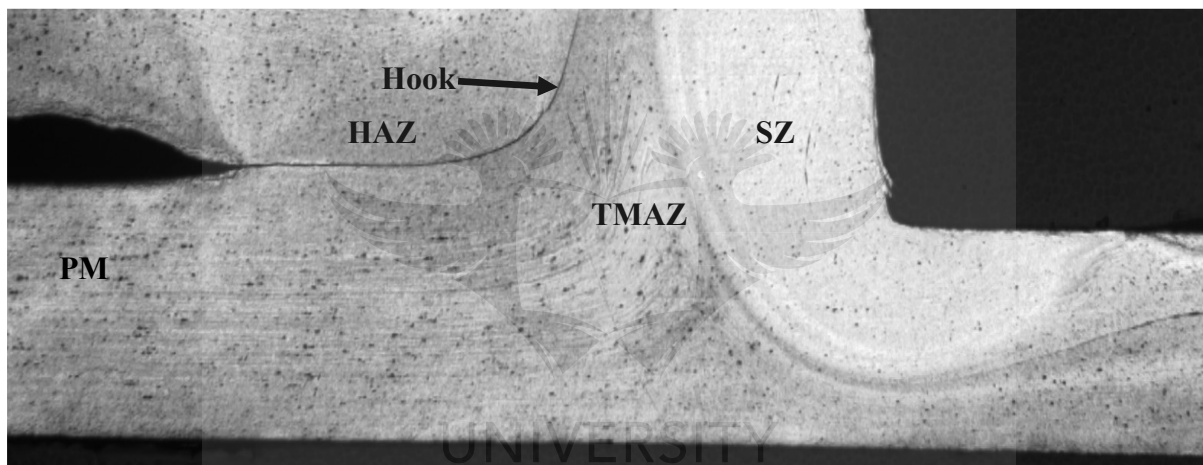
Cross-sectional appearance of a typical friction stir spot weld [3]
